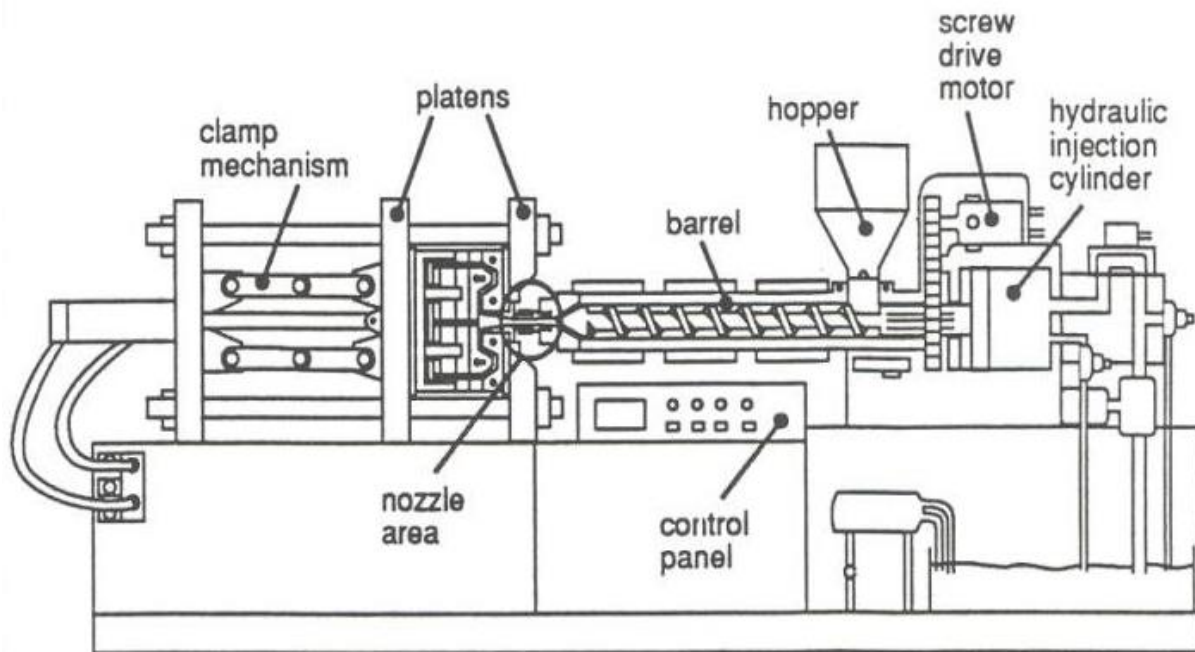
General structure of a plastic injection molding machine. Source: [55, 61].
